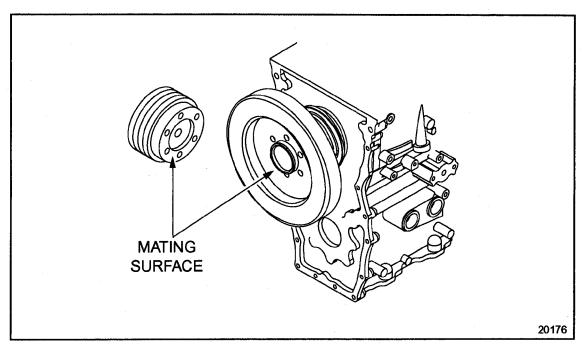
Crankshaft Pulley and Vibration Damper Inspection
